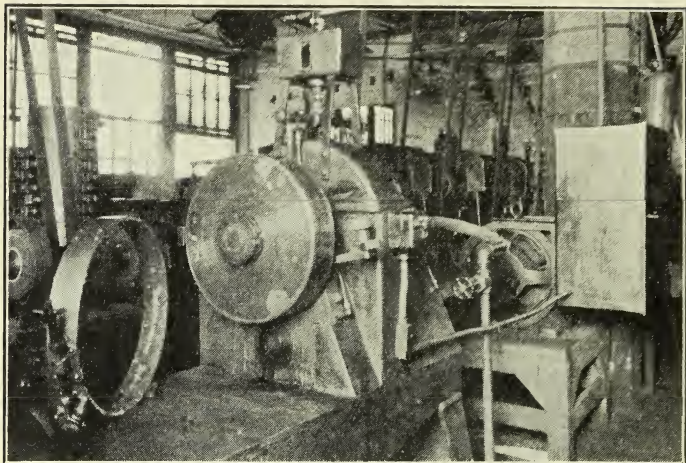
A SPECIAL MACHINE DEVELOPED BY THE PACKARD COMPANY FOR RUNNING-IN EXTERNAL BRAKE-BAND ASSEMBLIES
